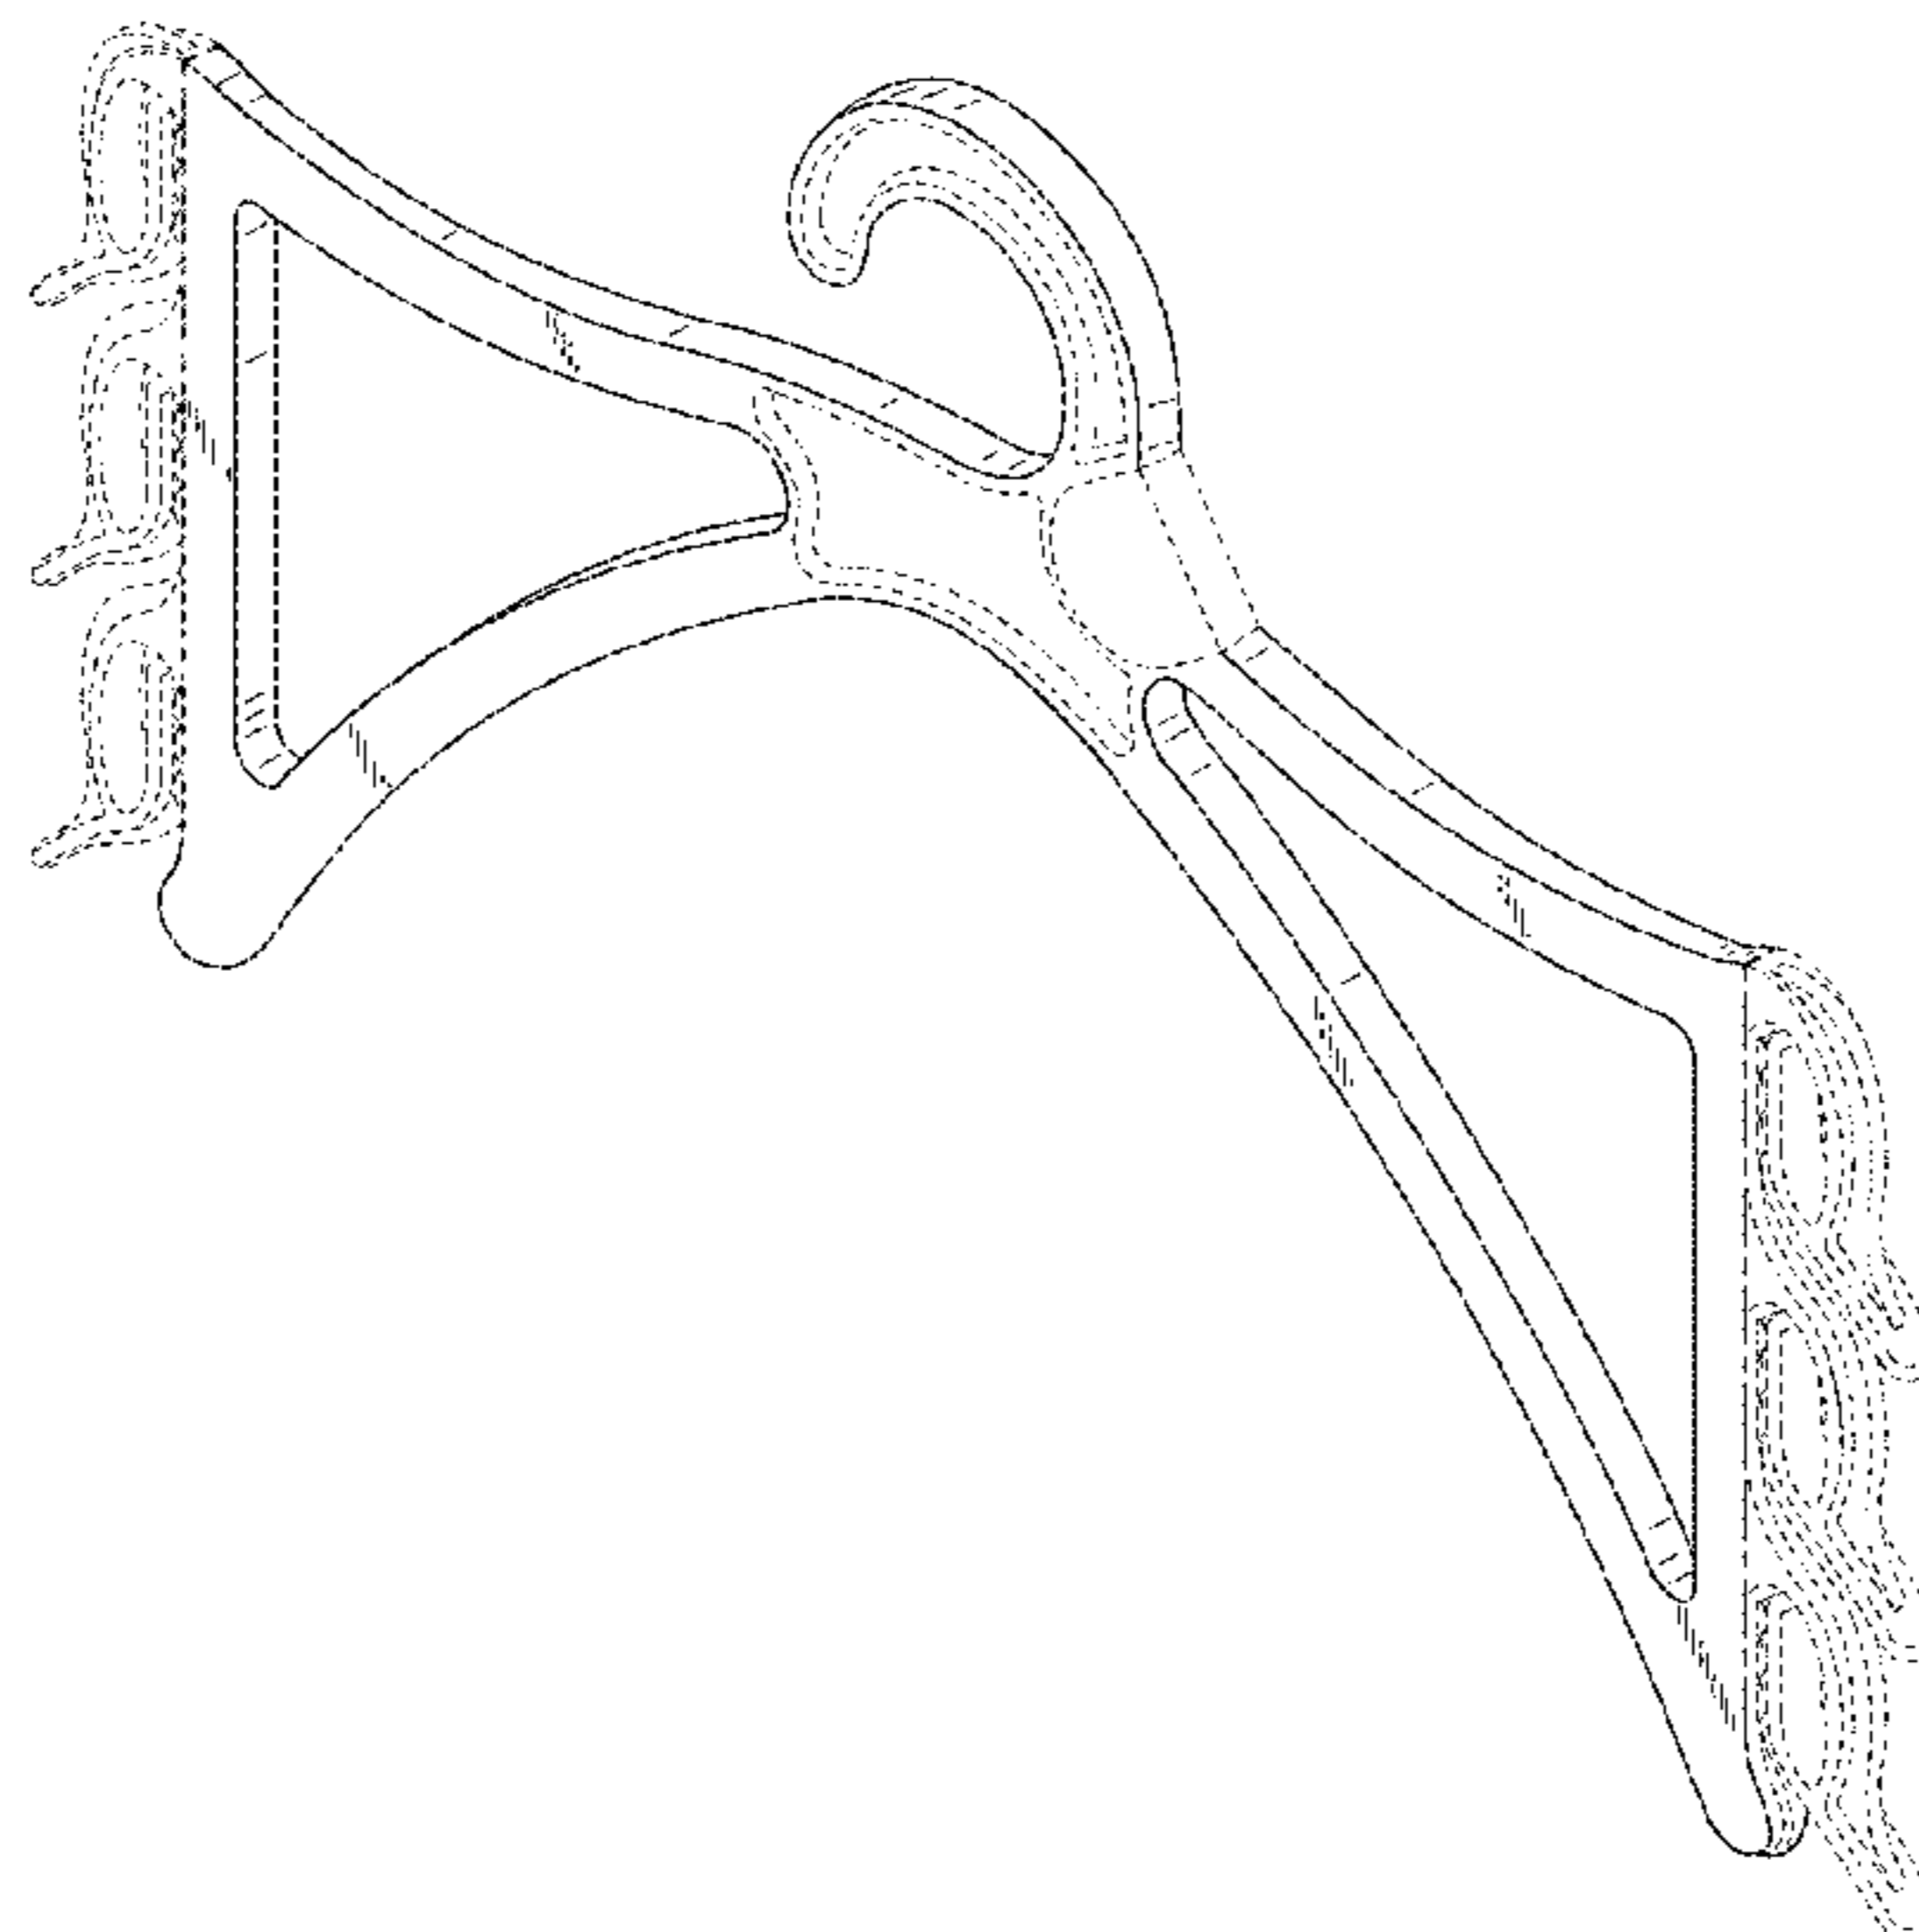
is a front, top perspective view of a hanger showing our new design;
